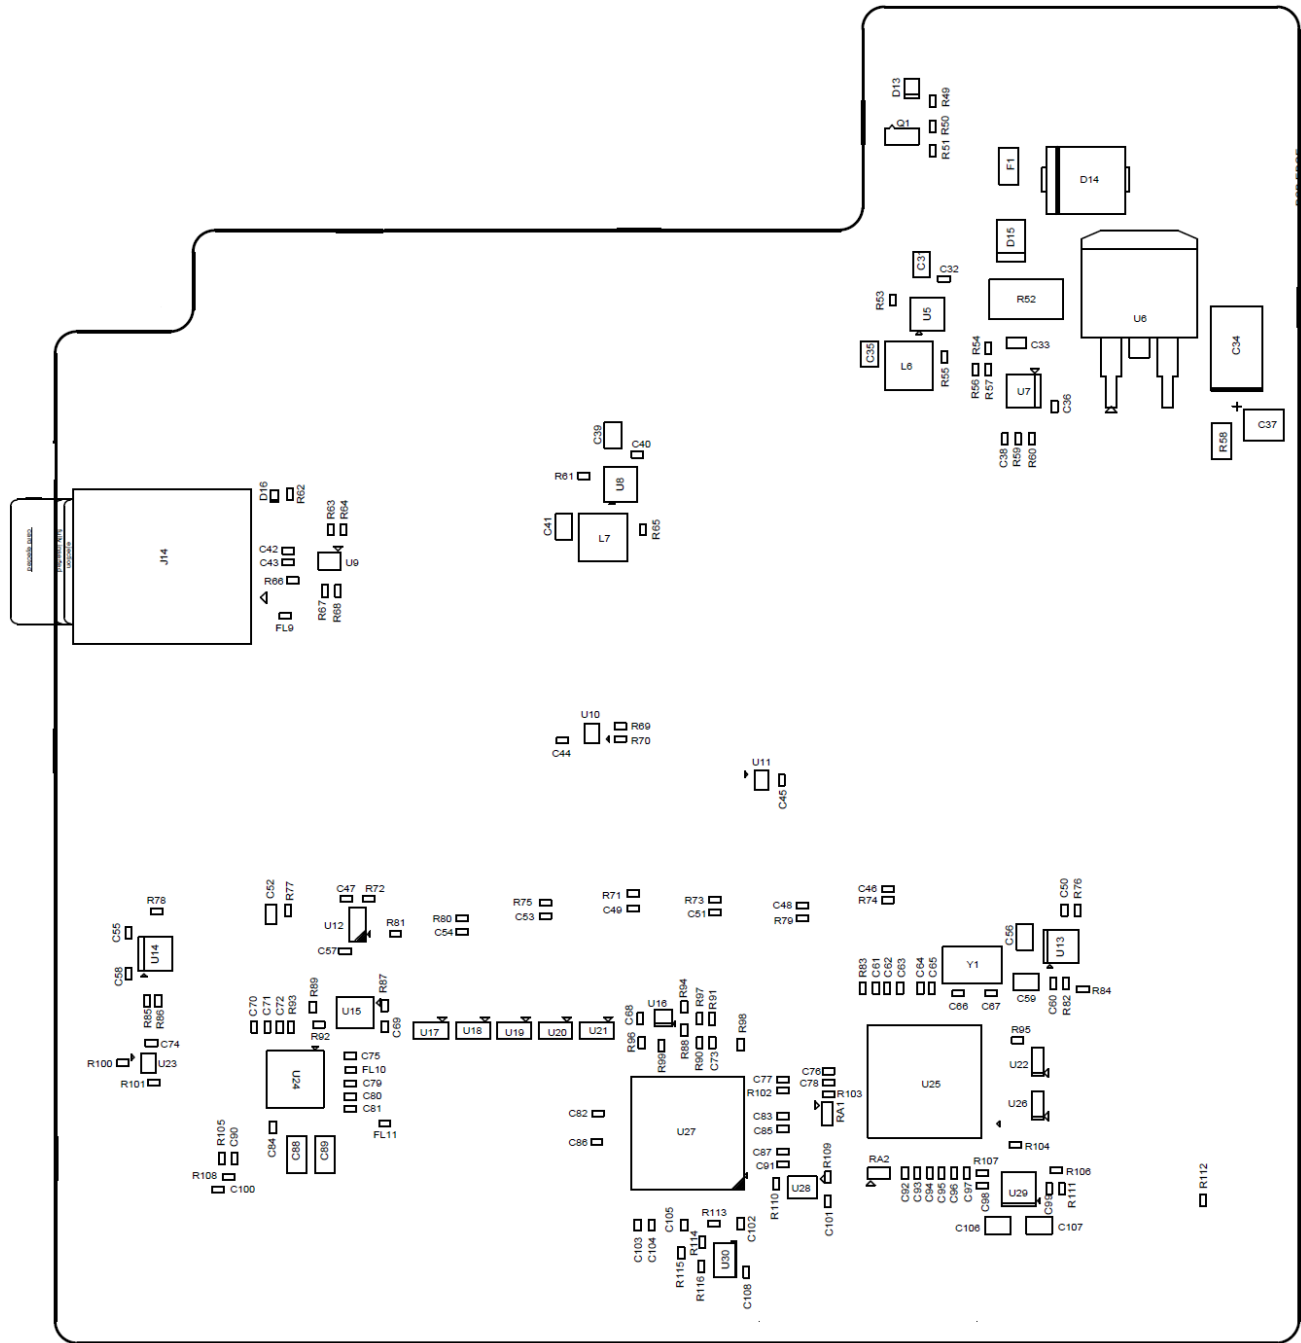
CSK Carrier Card Assembly Layout (Bottom)
